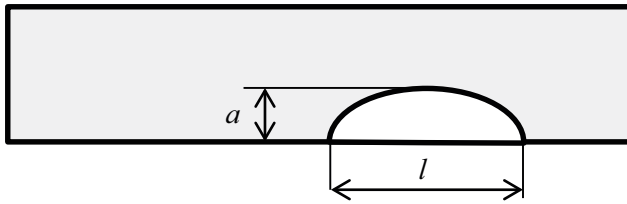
Schematic of a crack-like surface defect. This defect has length l and defect depth a (defect shape = l/a).
